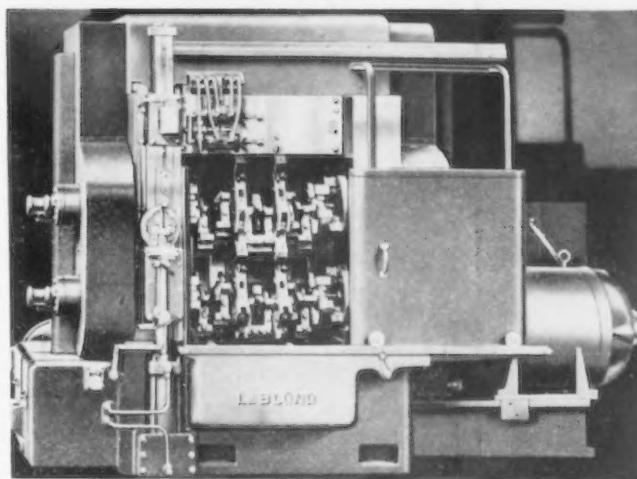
For rough and finish turning all pin bearings, this automatic crankshaft lathe is designated model 6AC.
